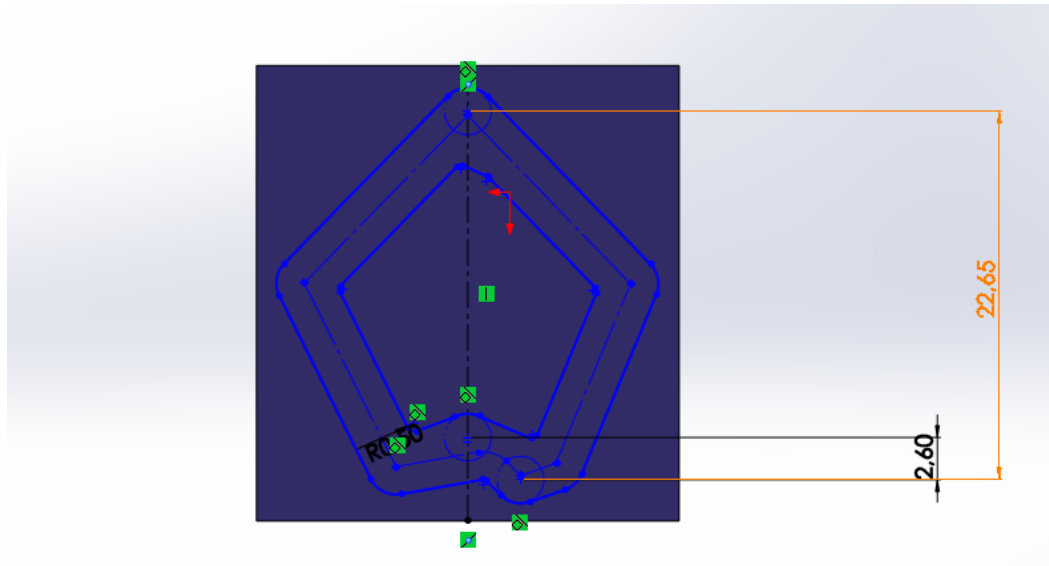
Cam plate path profile showing x1 and x2 displacement values
